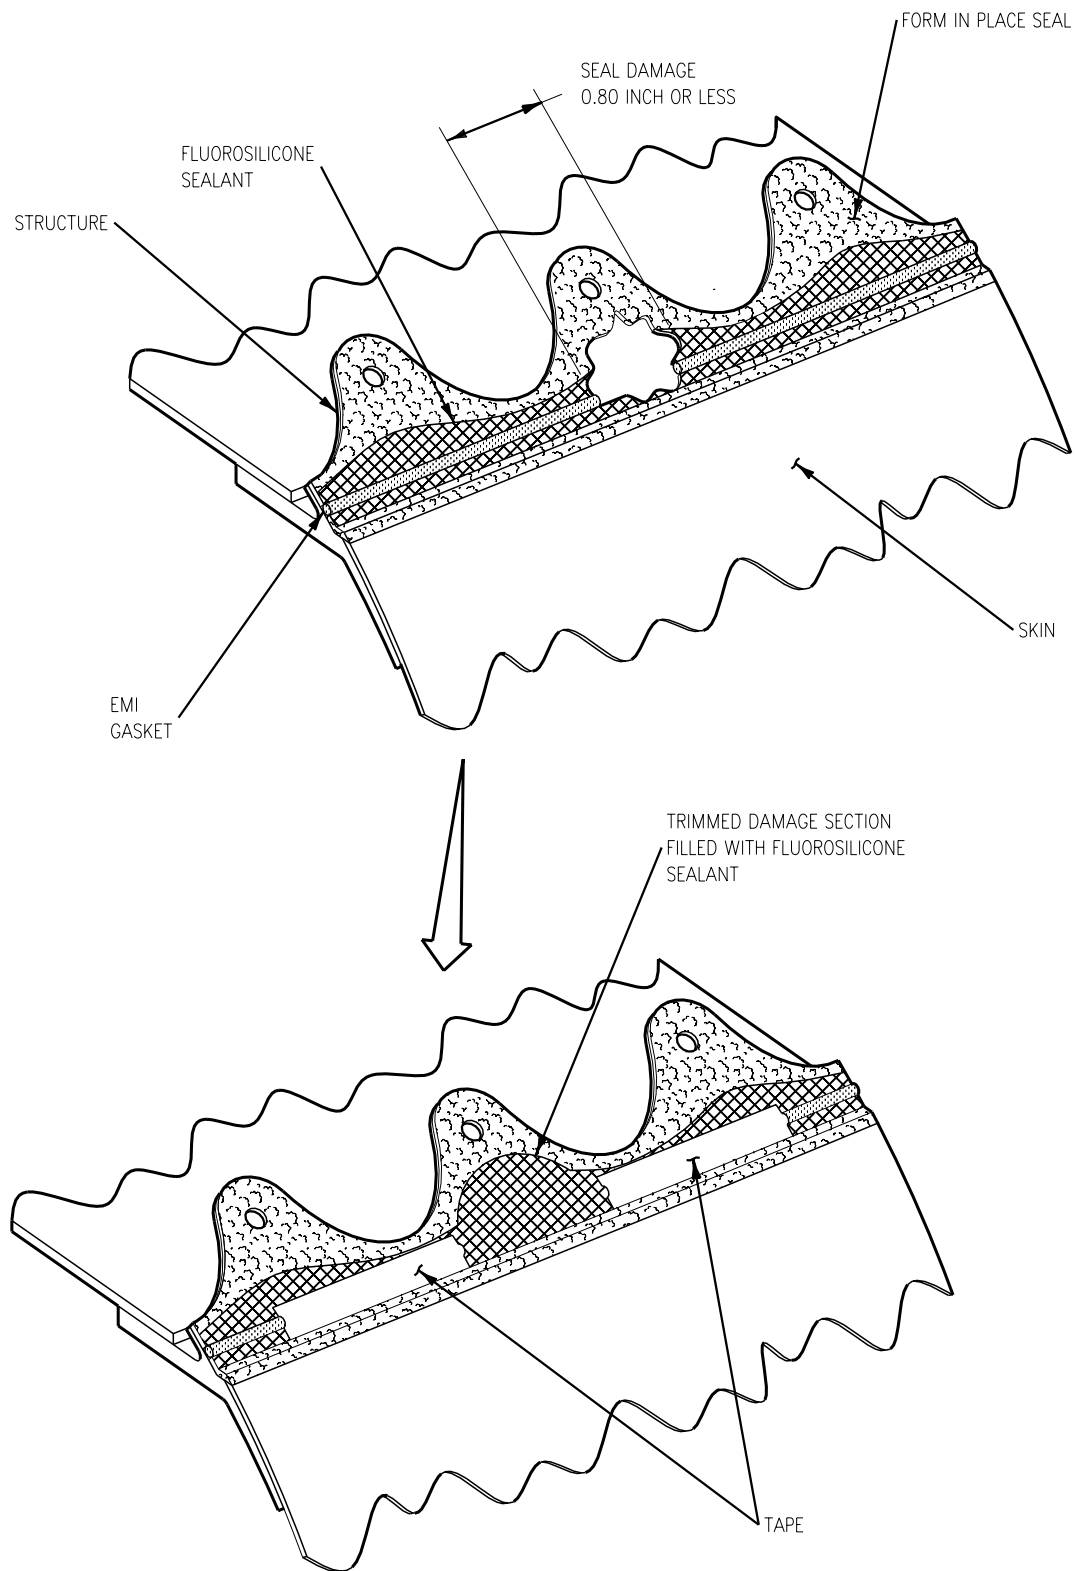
Form In Place Seal Damage Less Than 0.80 Inch
